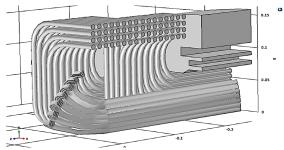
Cutaway isometric view of the flared-end region of the windings.
